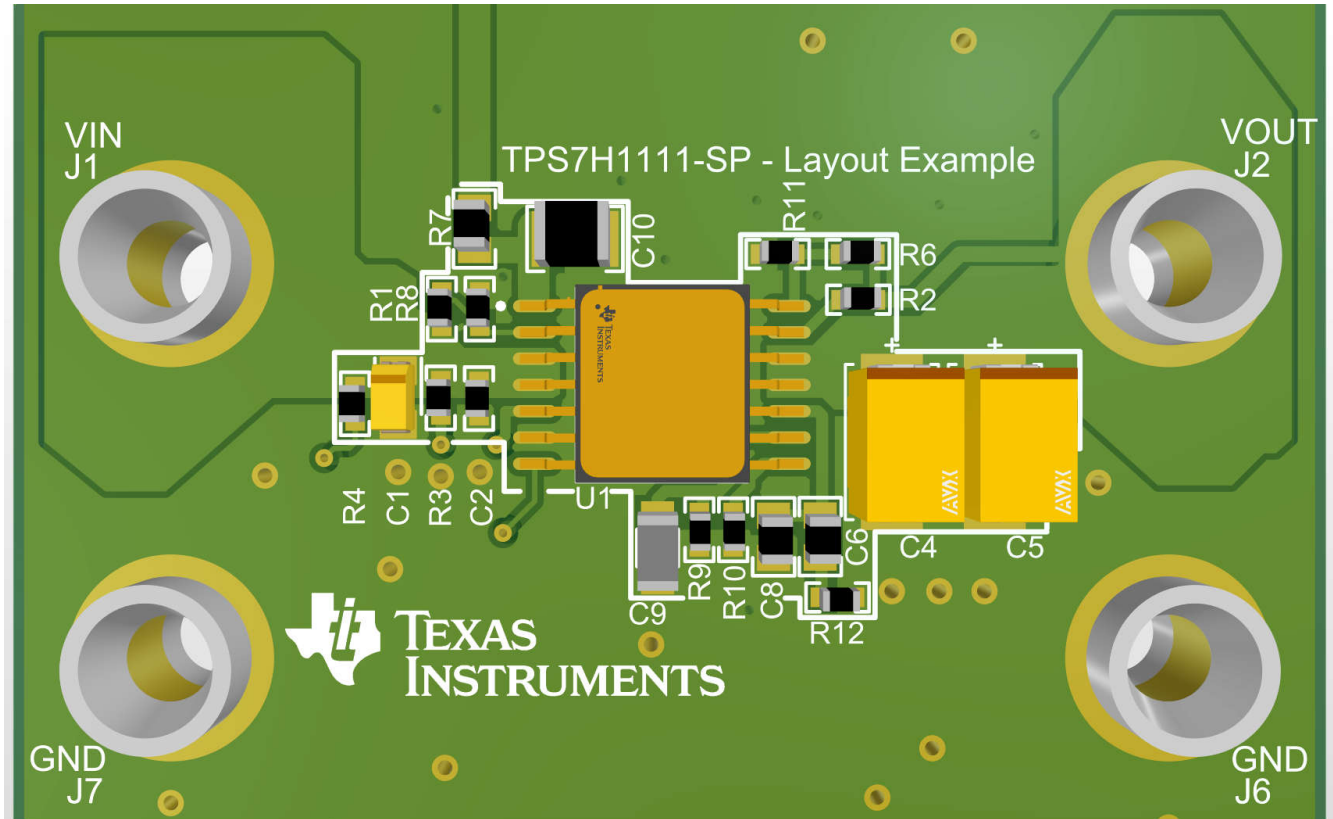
Printed Circuit Board Layout Example: 3D View
